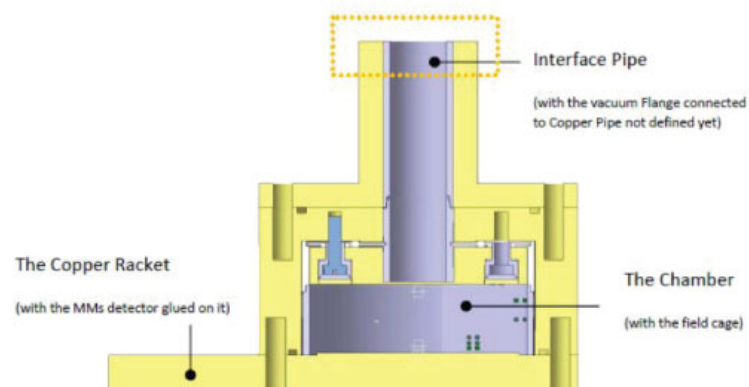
Cross-section of the detector, chamber, inner shielding and interface to cold bore.
